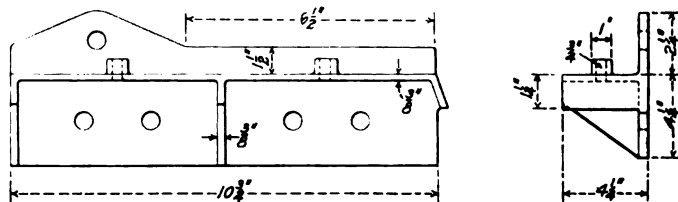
Top End Post Casting with Top and Bottom Lips on the Same Side.
